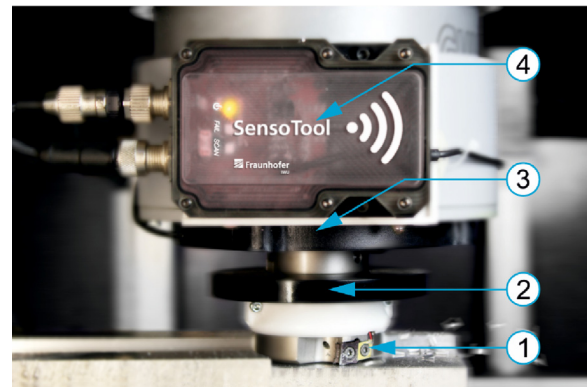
SensoTool in application environment. Milling tool with integrated sensor (1), tool-mounted antenna (2), spindle-mounted antenna (3), gateway (4).
